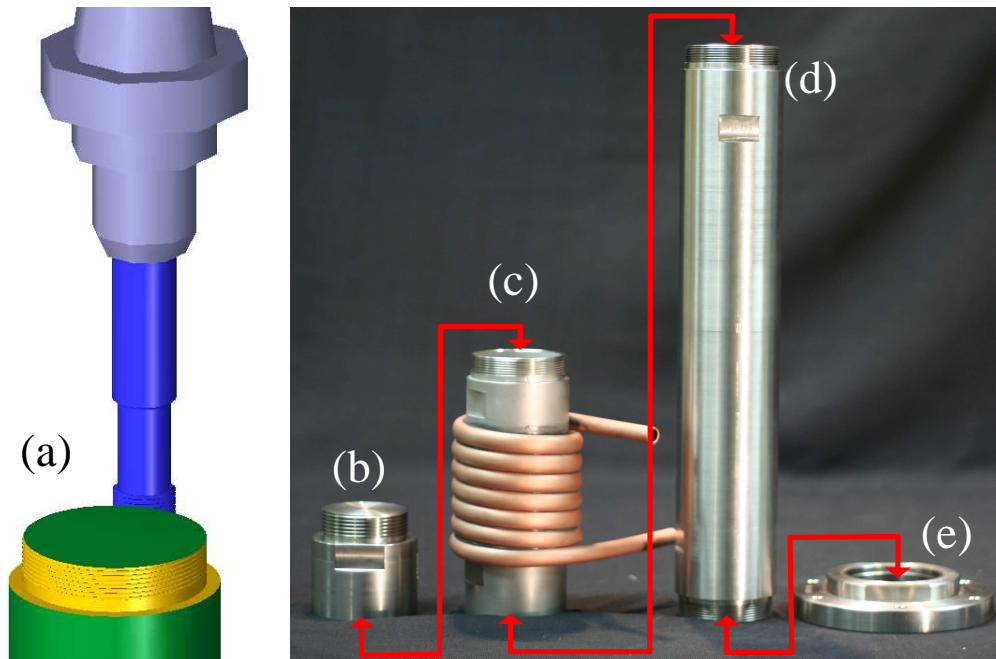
Top loading-column assembly: (a) virtual machining of threaded interface using CAM software. Threaded interface between components of the loading column: (b) load-cell thread adapter; (c) top heat-exchanger; (d) top loading-column pipe; (e) top die-holder. All interfaces (red lines) were machined using the same machining code, reducing tolerance build-up to a minimum.
